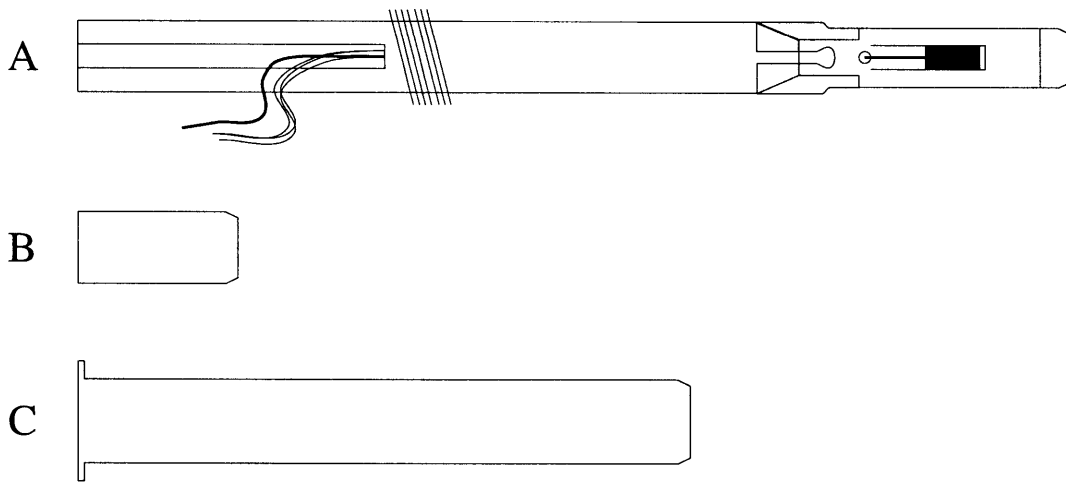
The three parts of hhv5.0. A: Inner core, B: Insulating sheath, and C: Outer body.
